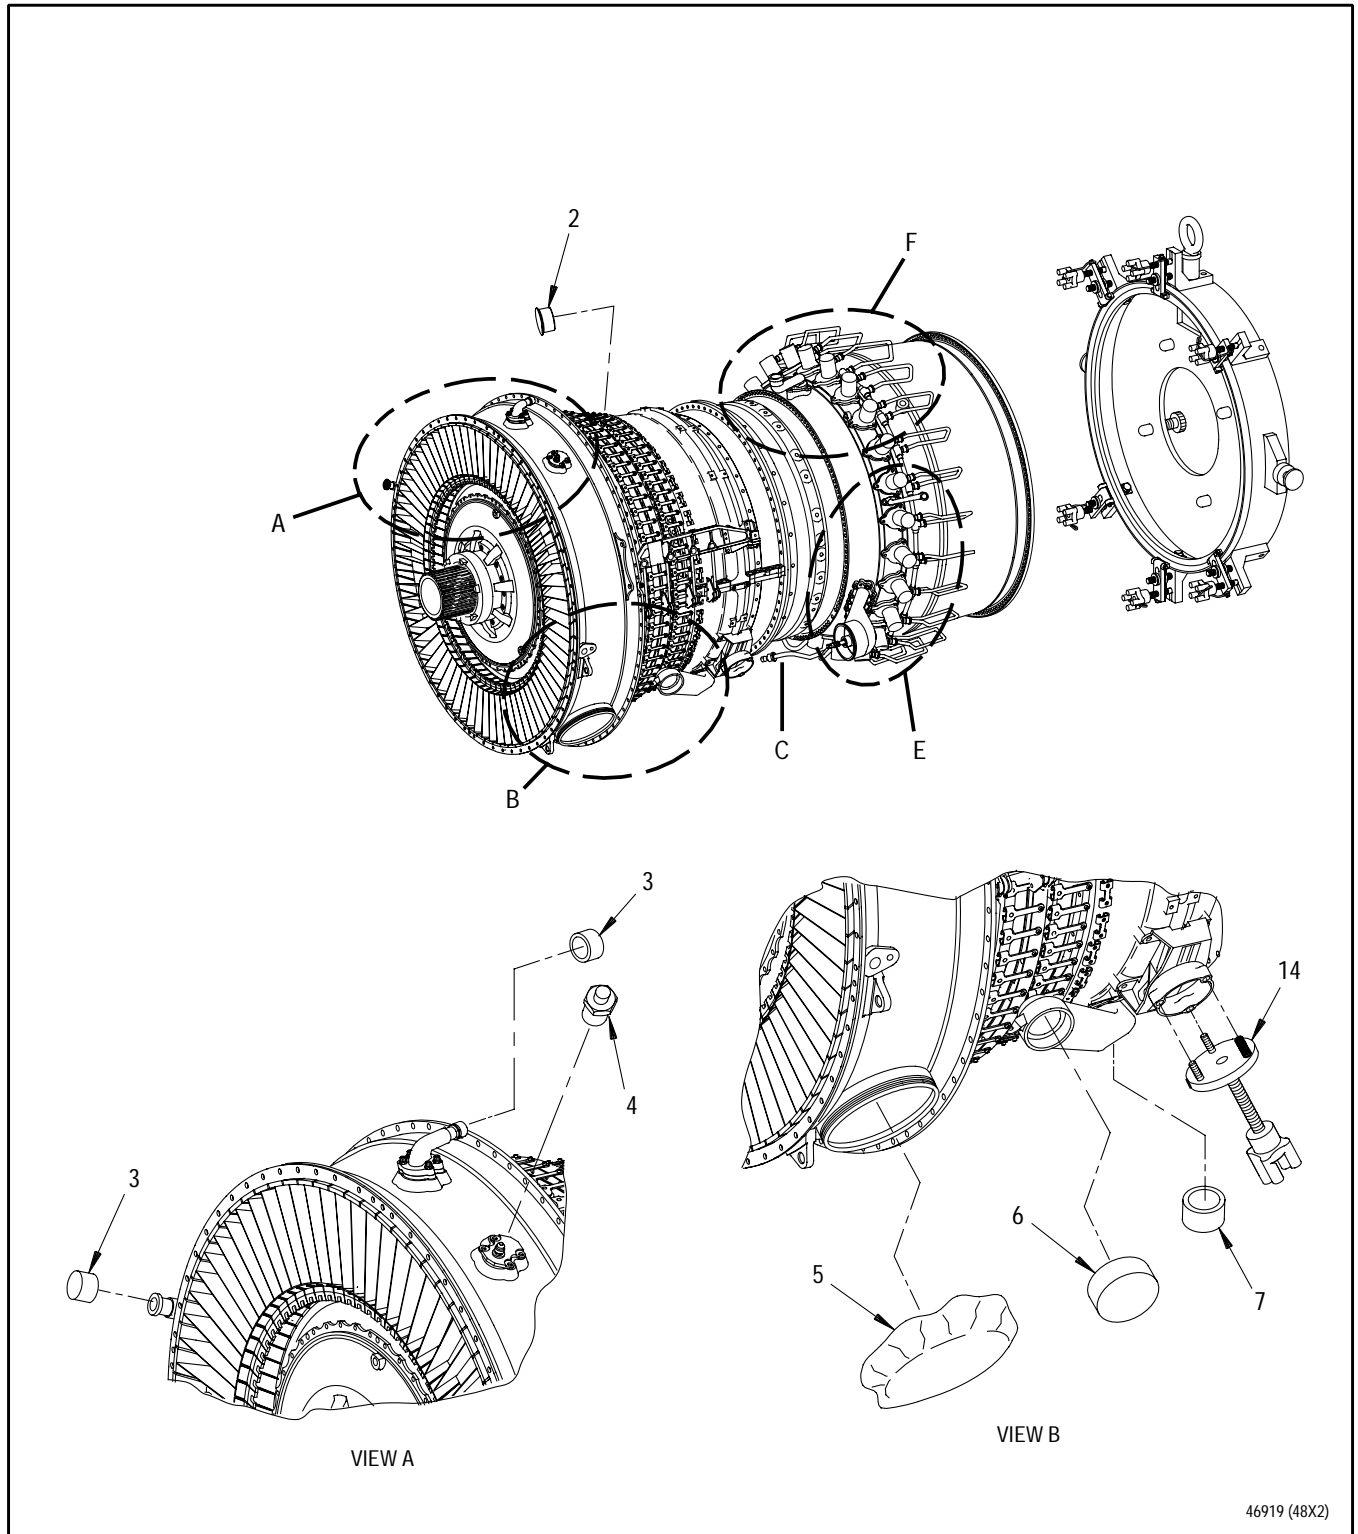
Engine Core Module - Shipping Preparation (Sheet 1 of 3)
